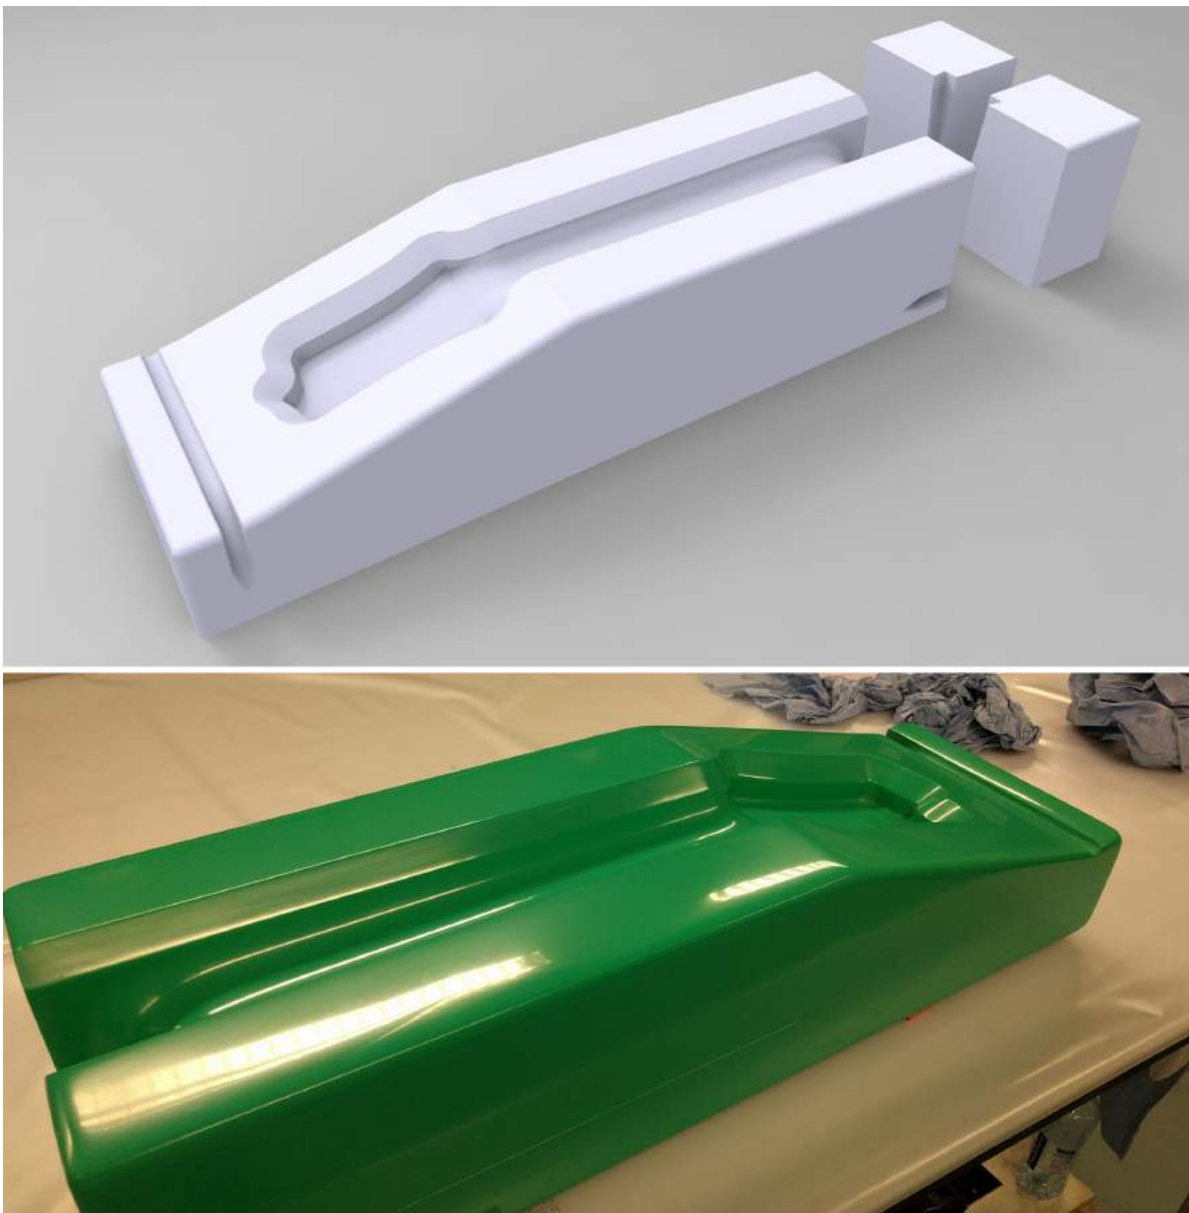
Top: design rendering of the second version of the neck mould. Bottom: photo of the produced second version of the main piece of the neck mould.
